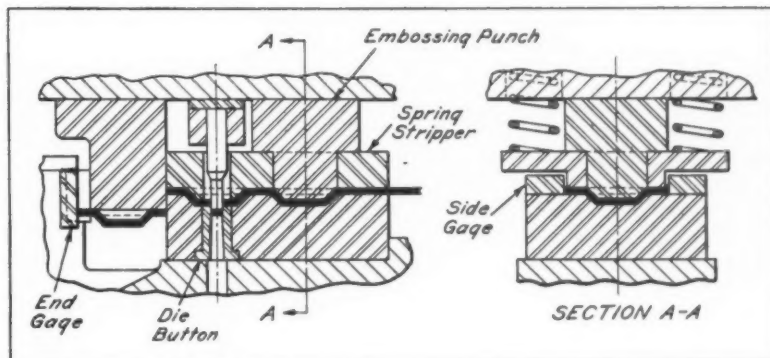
Spring Stripper Used in a Forming, Piercing, and Cutting-off Die
